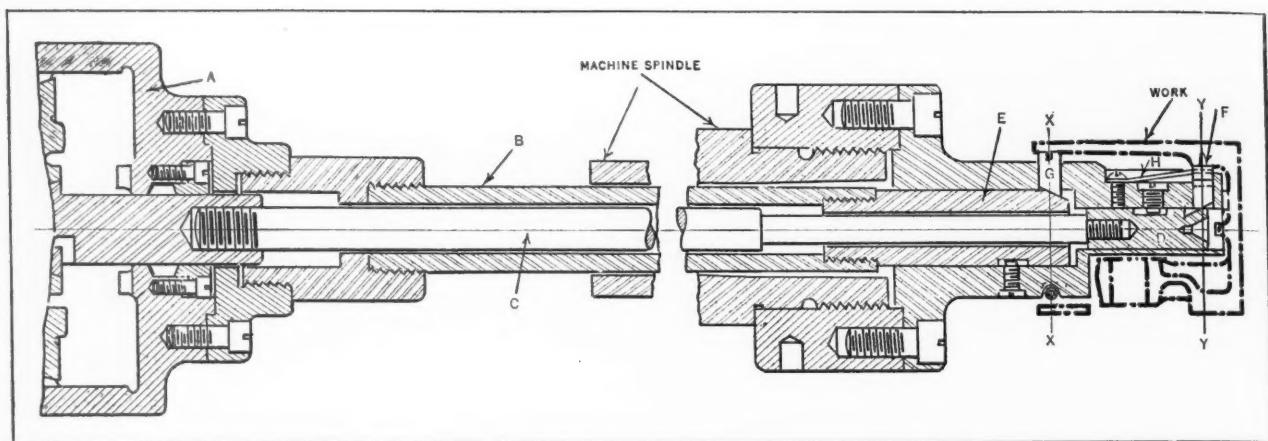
Air Equipment Designed to Hold Automobile Pistons in a Lathe or Similar Machine Tool
